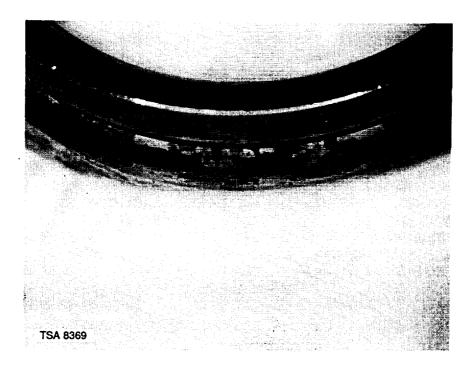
Bearing No. 1004A, Inner Race, 12X Magnification.
